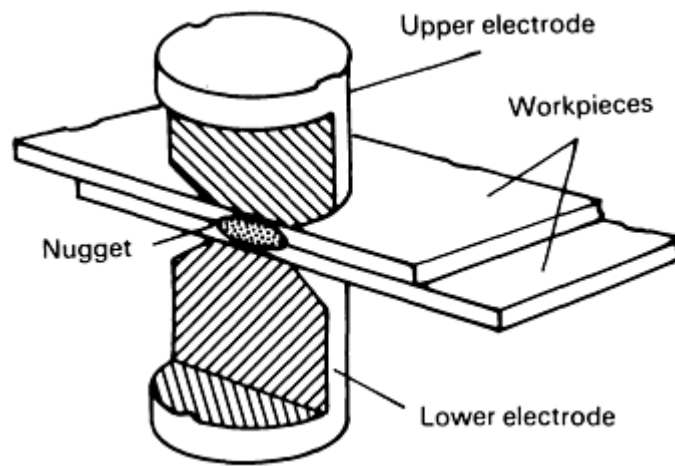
CUTAWAY VIEW SHOWING LOCATION AND SHAPE OF WELD NUGGET RELATIVE TO THE INNER AND OUTER SURFACES OF WORKPIECES IN A RESISTANCE SPOT WELDING SETUP
